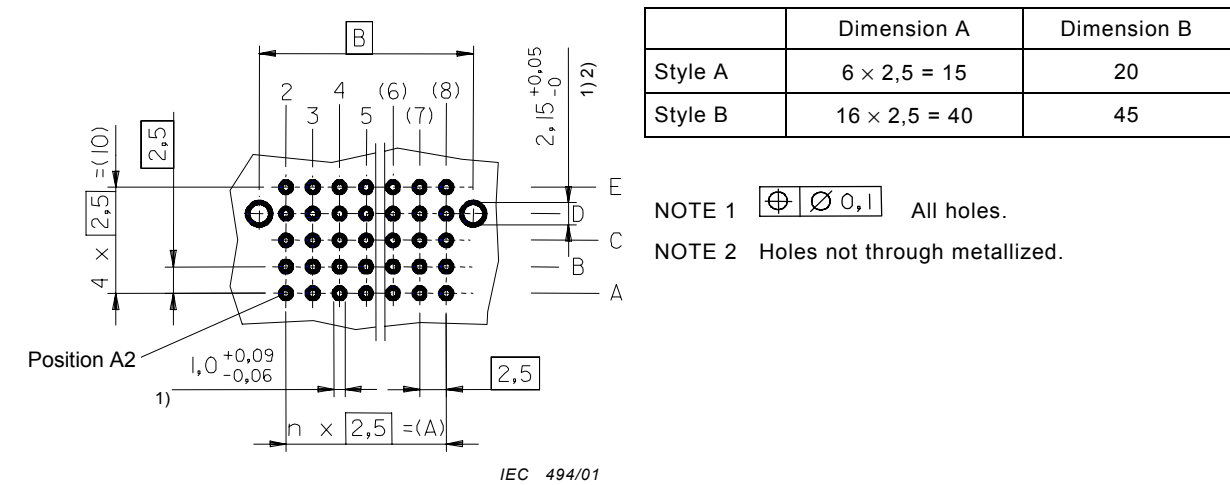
Example of hole pattern on backplane in the 25 mm equipment practice
